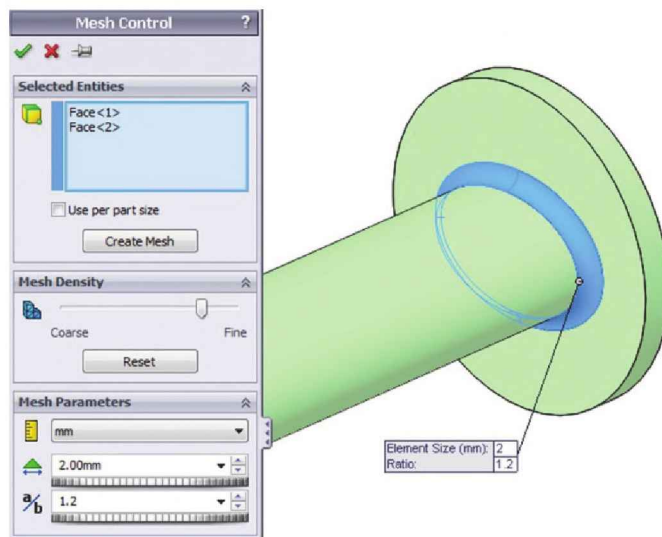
Mesh control to the fillet; notice that the fillet face is divided into two faces by a split line.
